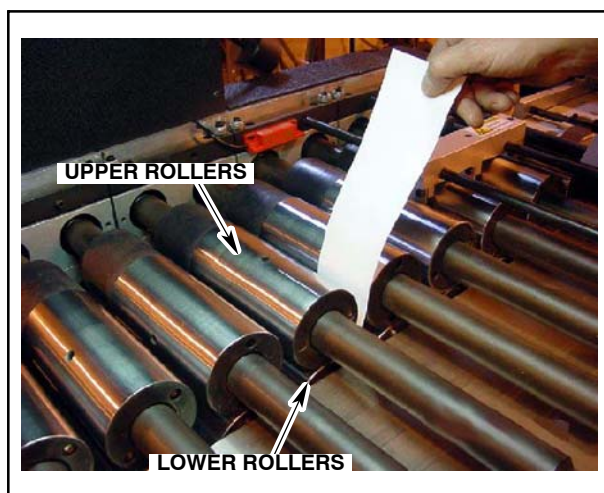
Raise the Rollers By Tightening the Nuts on the Bearing Blocks.
